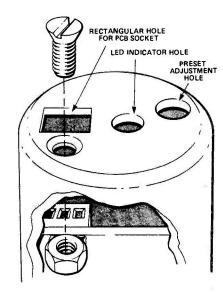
This is how we mounted the PCB in the aluminium tube. The nut is soldered to the ground track under
